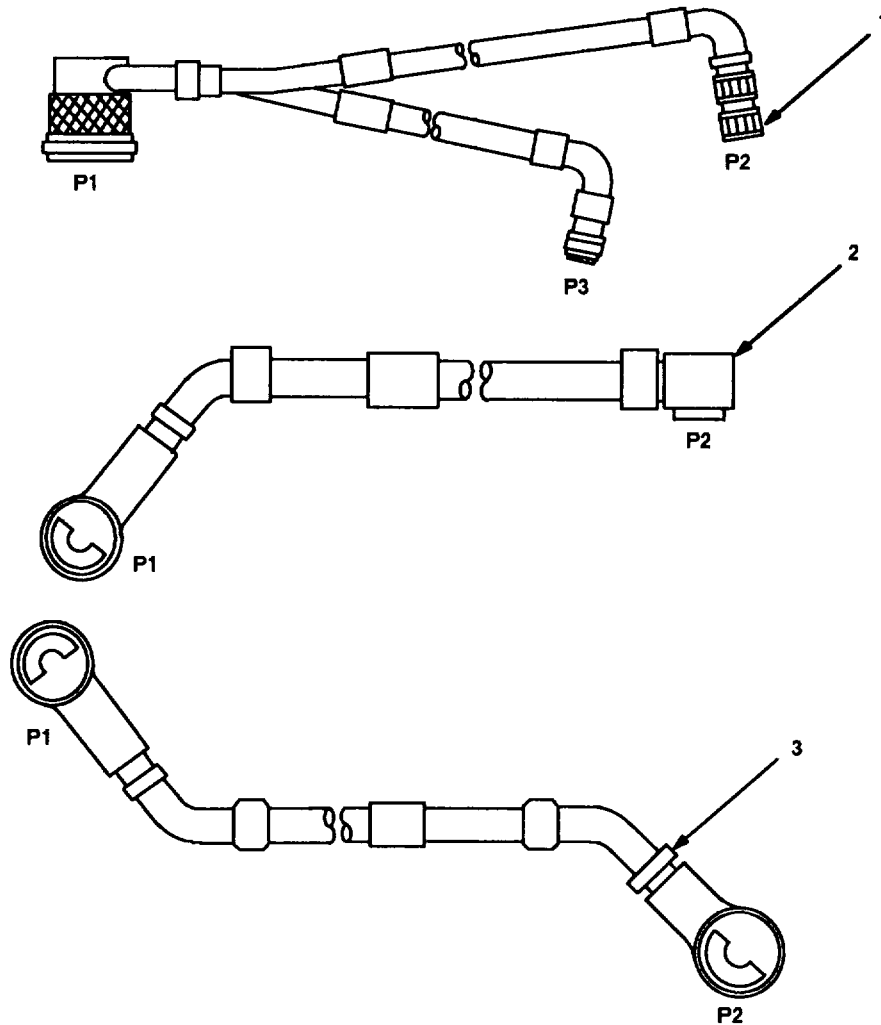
TSEC/KY-57 Illustrated Parts List
